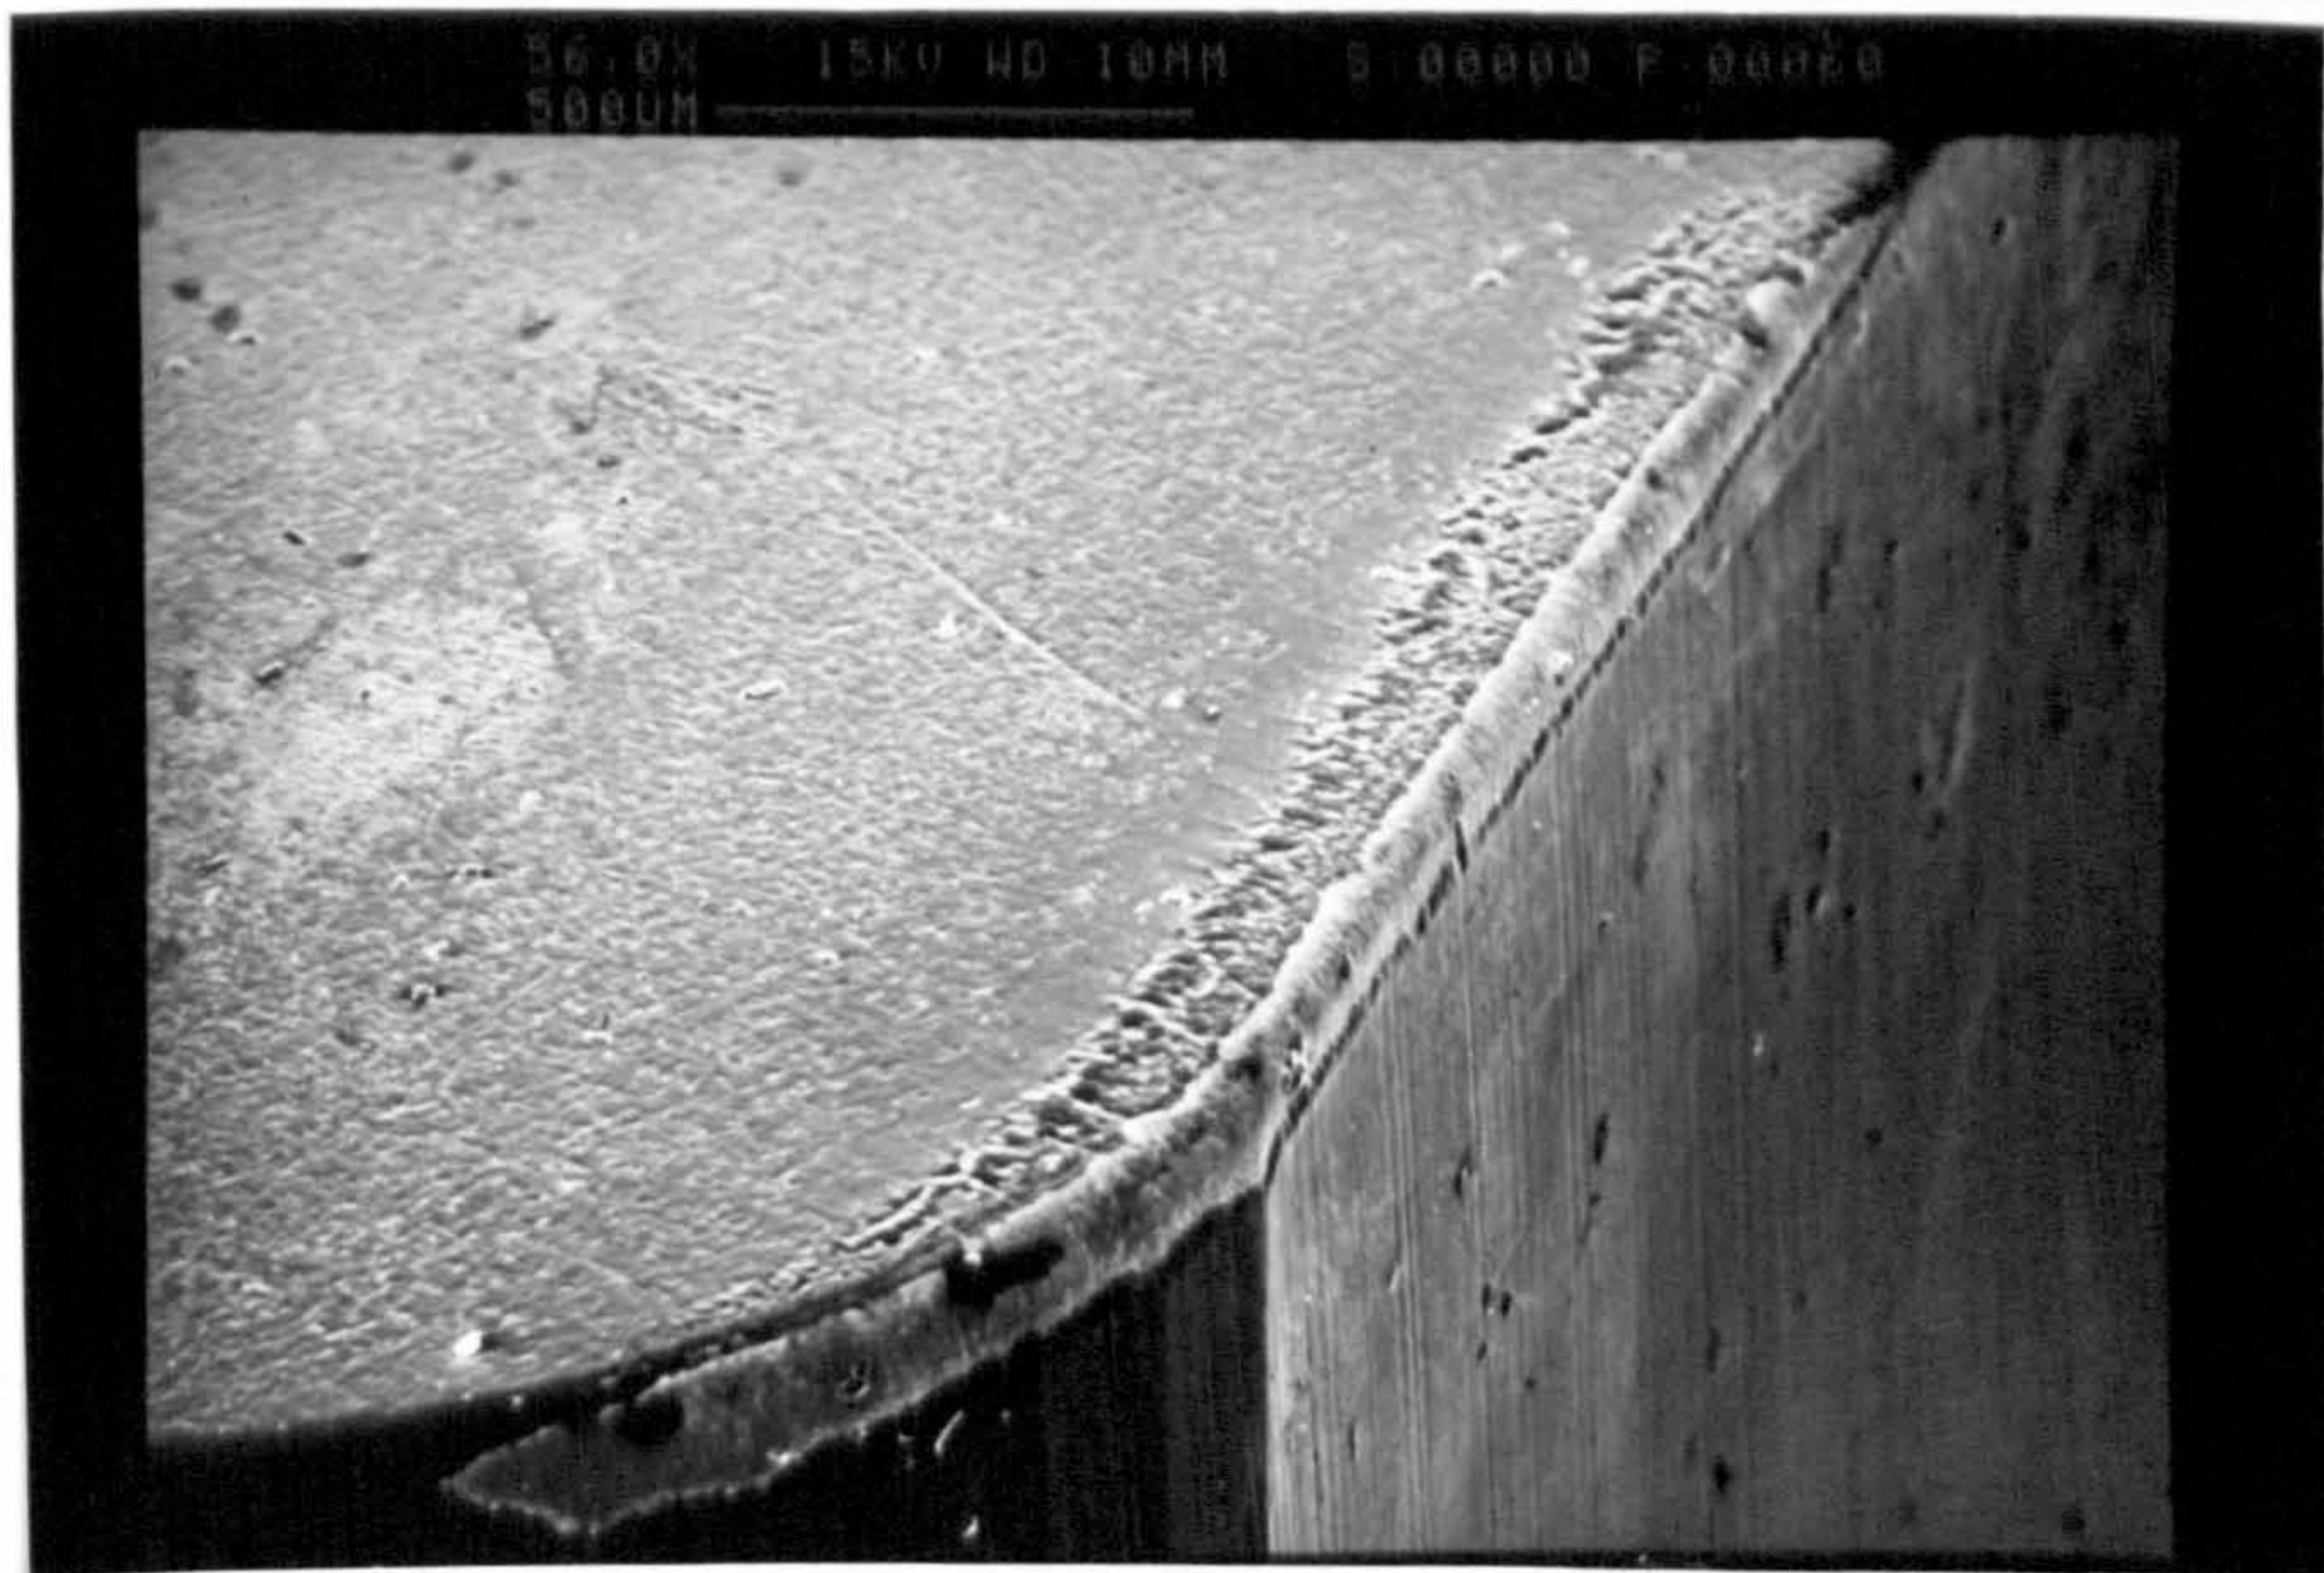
Typical wear pattern of a TiC-coated carbide tool (Speed =150m/min, feed = 0.20 mm/rev, cutting time = 5 min)
